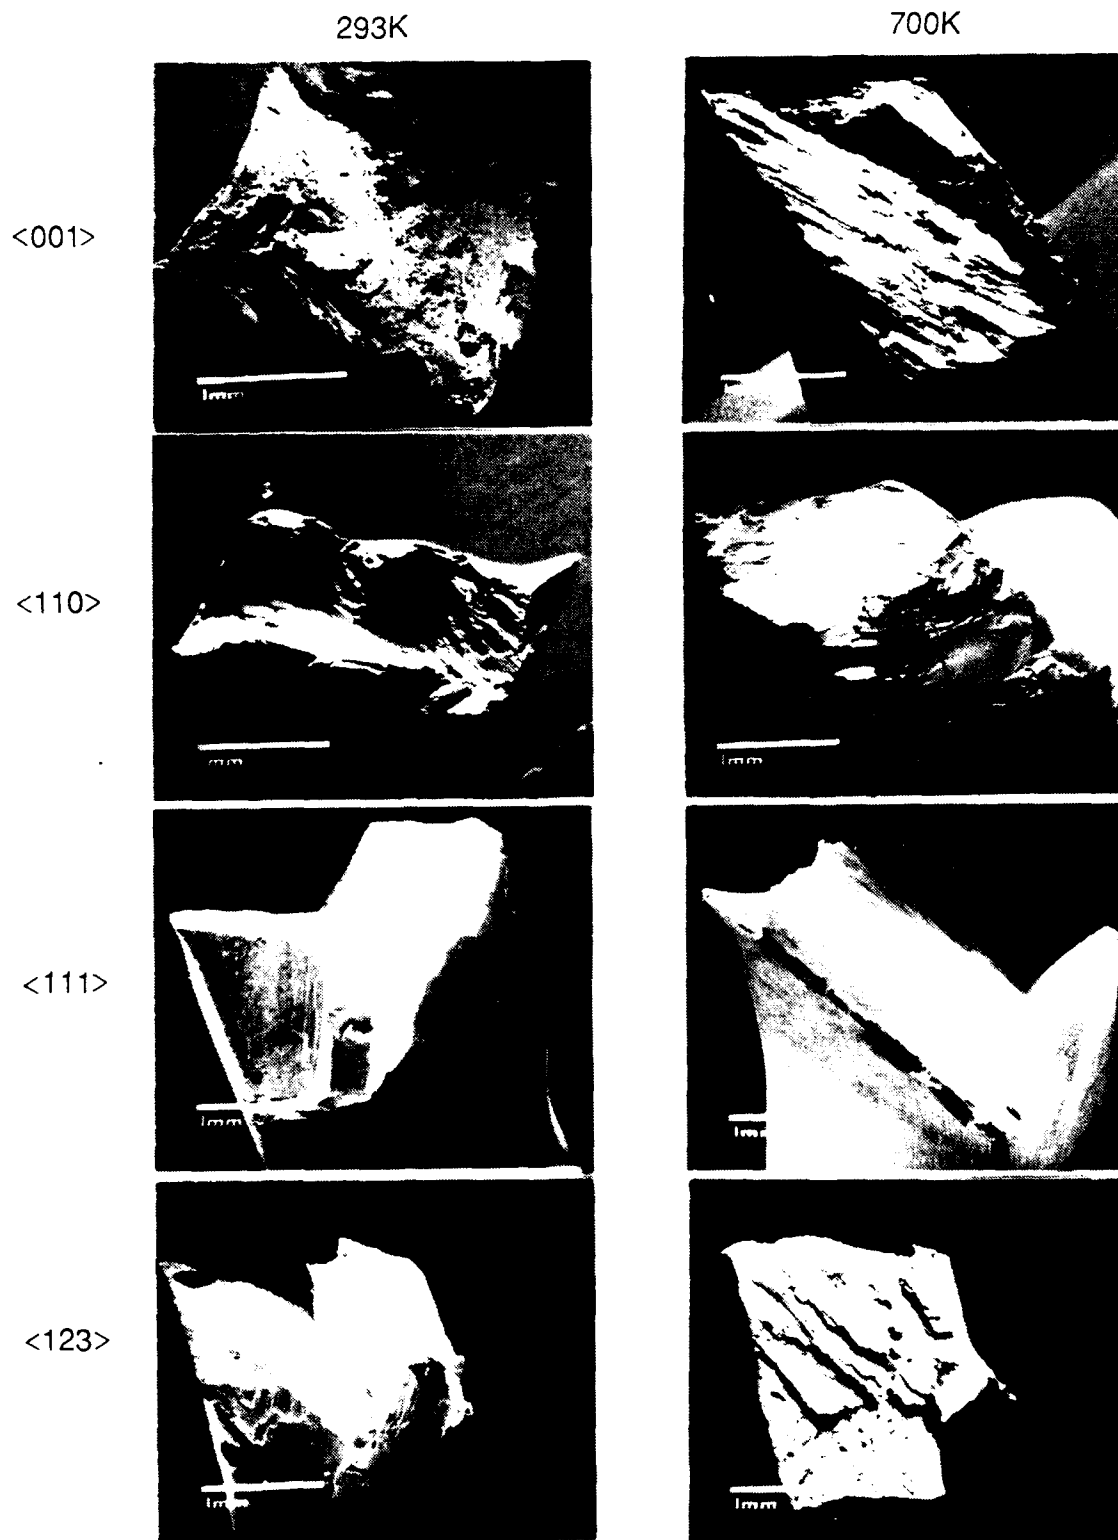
Appearance of Fracture Surfaces in the Binary Alloy Al-240 Resulting from Tensile Testing at 293K (left photos) and 700K (right photos). The tensile stress axes are from top to bottom <001>, <110>, <111>, and <123>.
